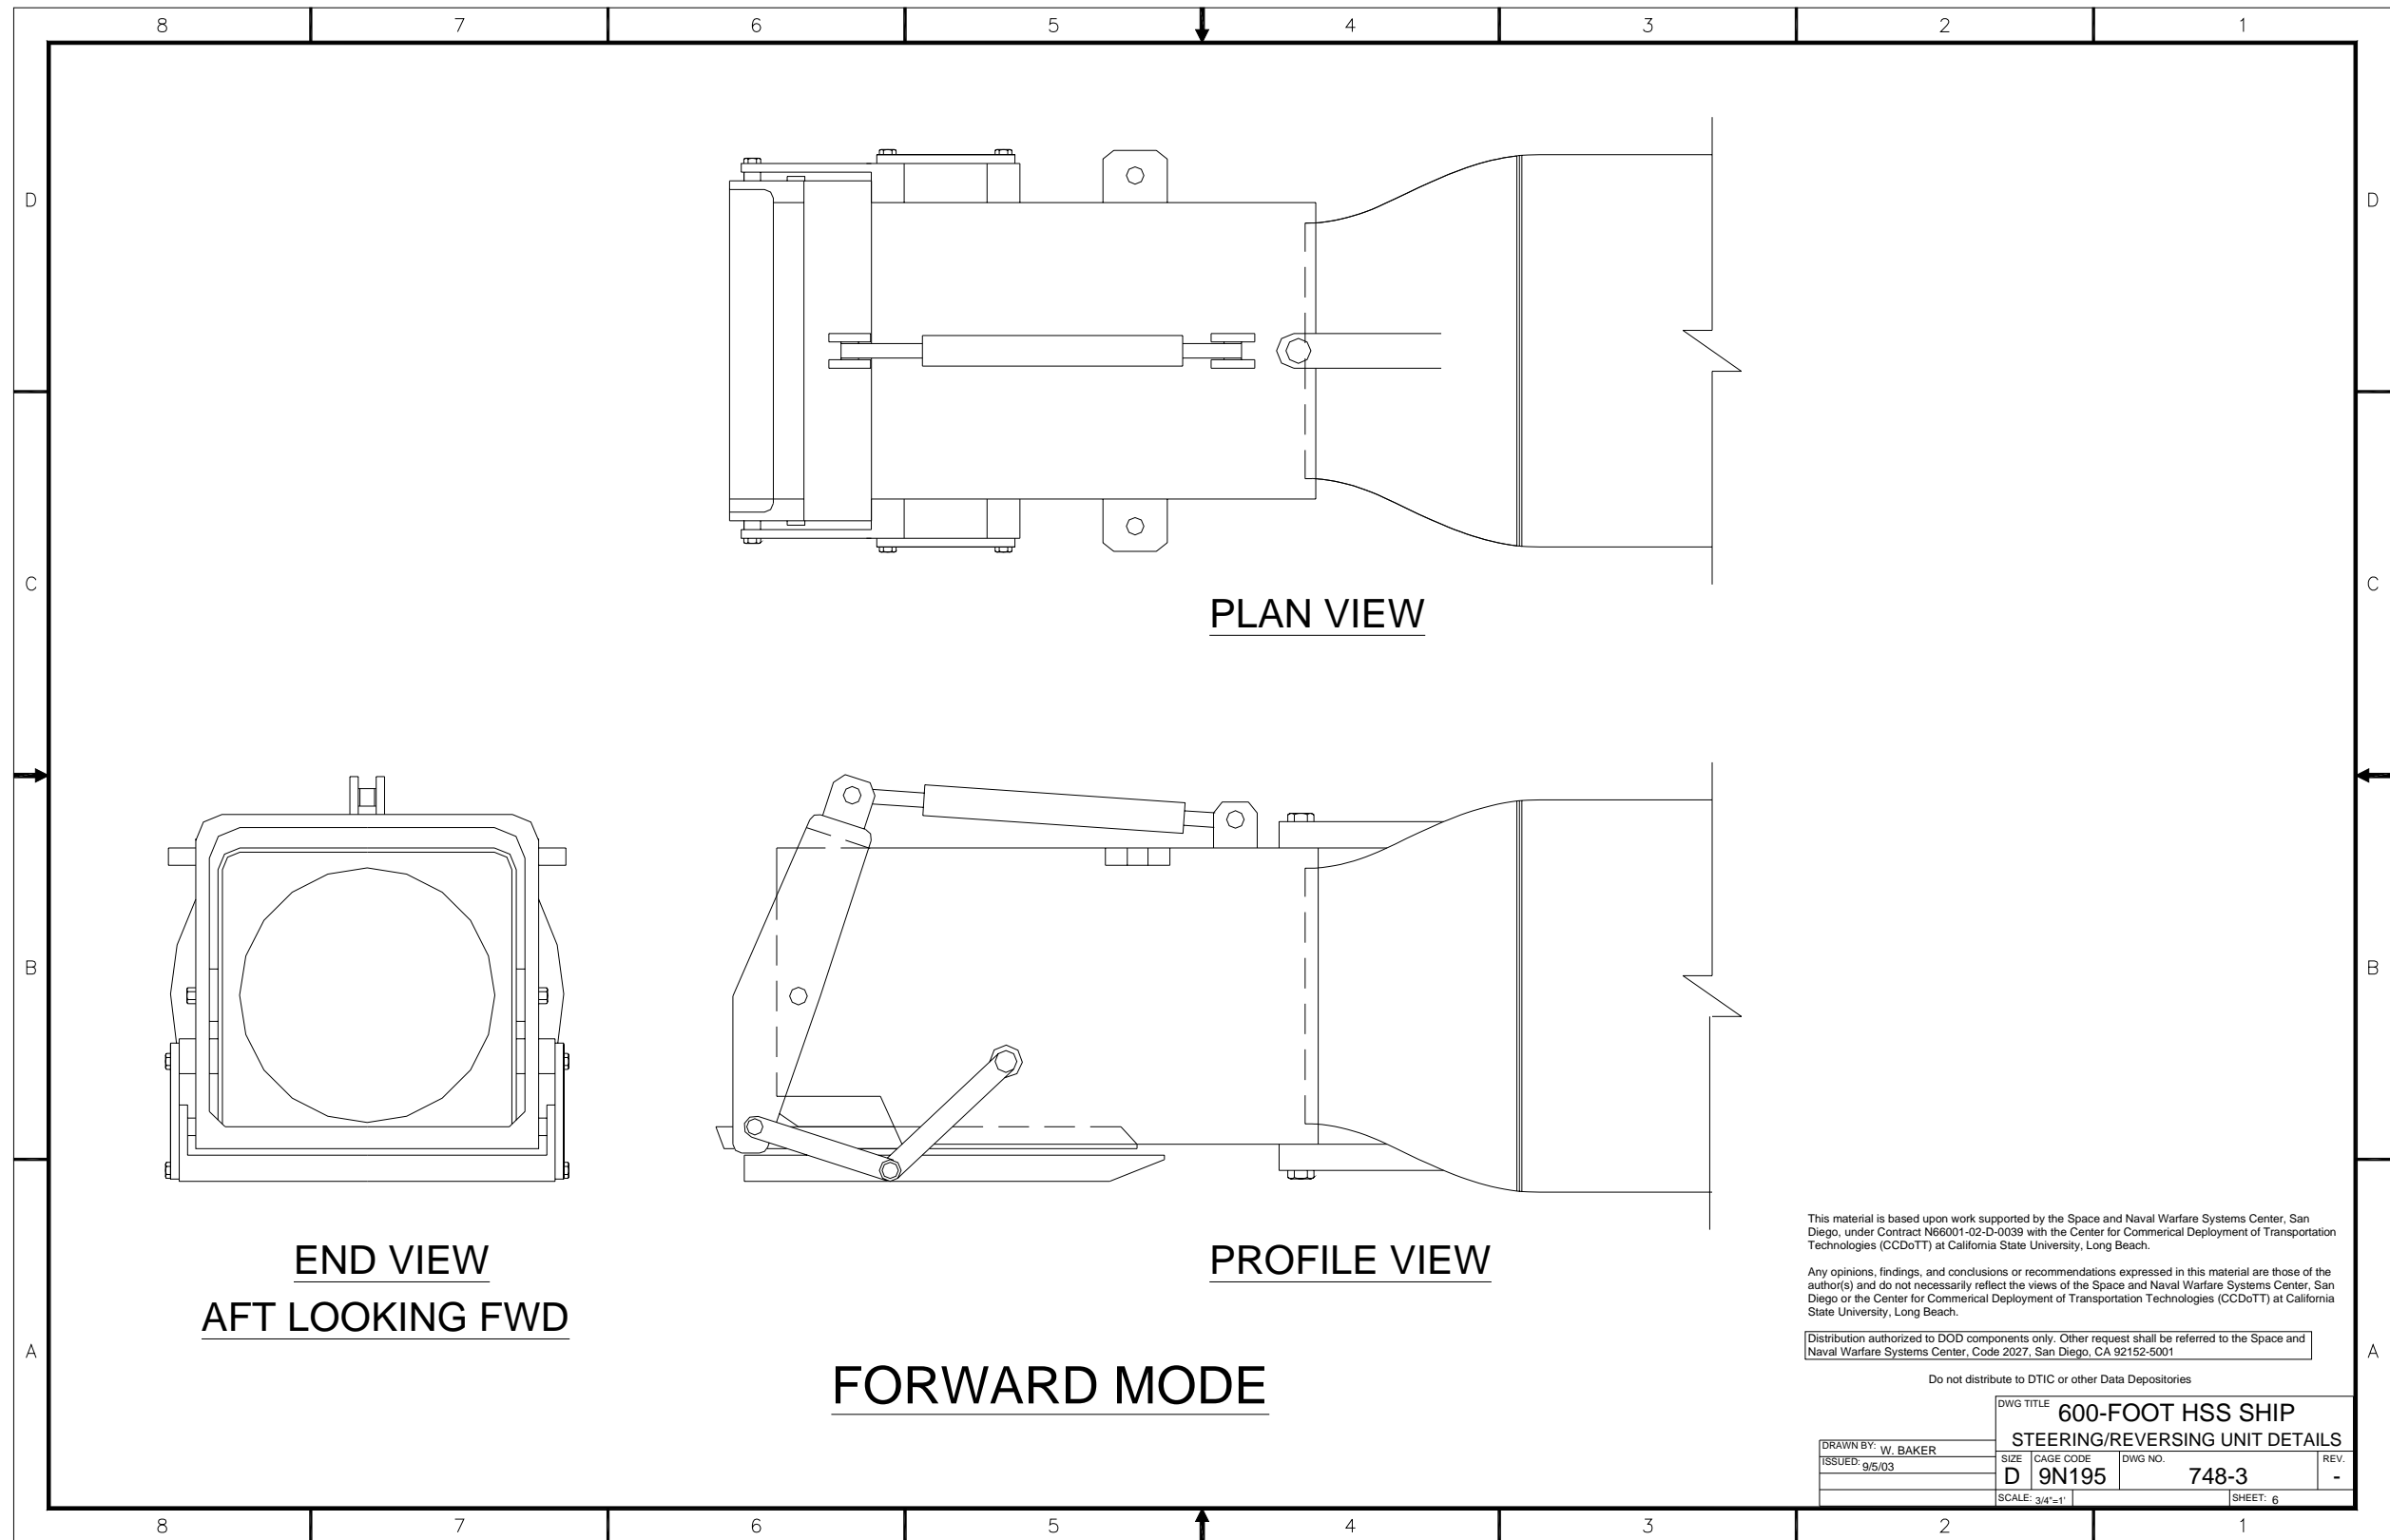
600-Foot High-Speed Sealift (HSS) Steering/Reversing Unit Details – Forward Mode
